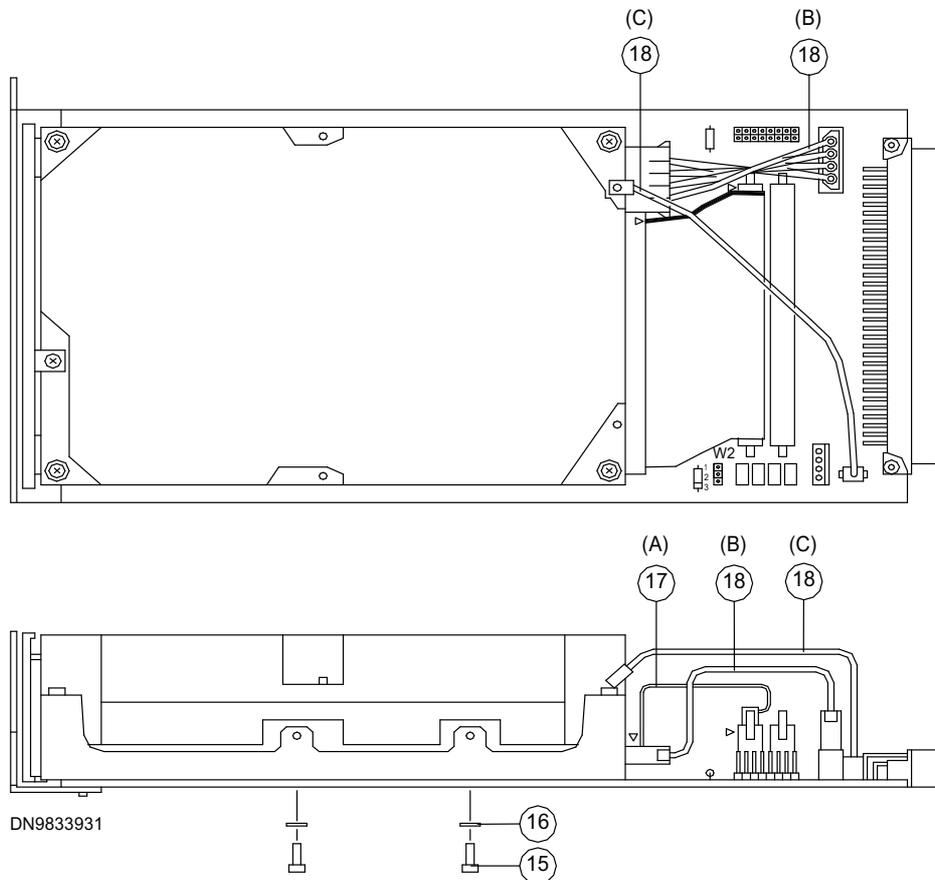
Installing the hard disk drive WDU on WDAD adapter
